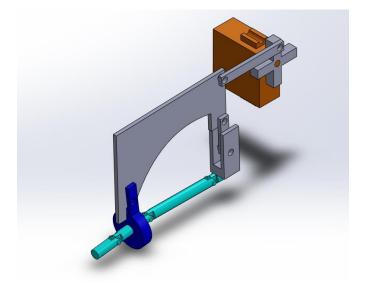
CAD Mockup of Single Finger Mechanism with Motor Attached
